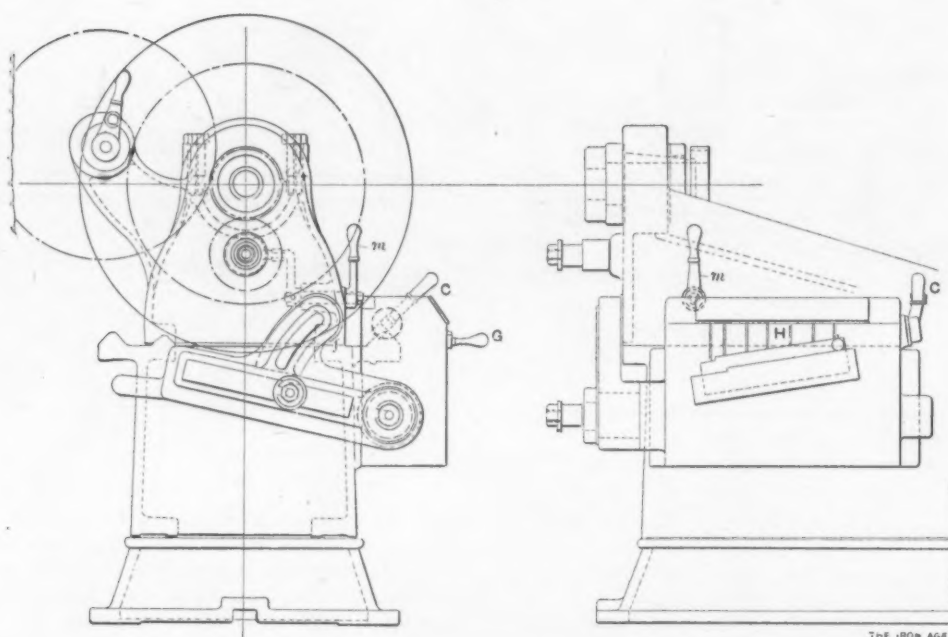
Detail End and Side Views Showing the Manipulation of the Change Gear Feed.
